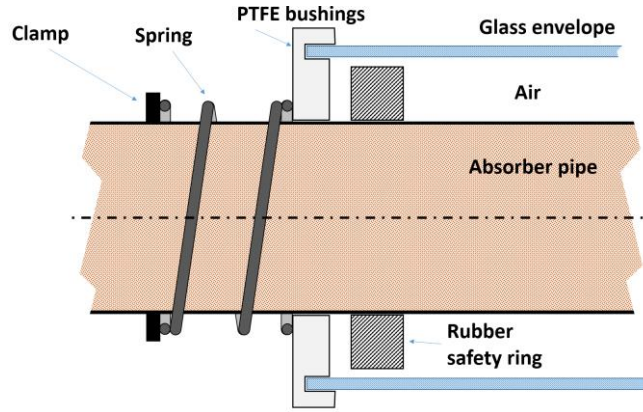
Zoom-in view of the heat collection elements and the PTFE bushings [12]
